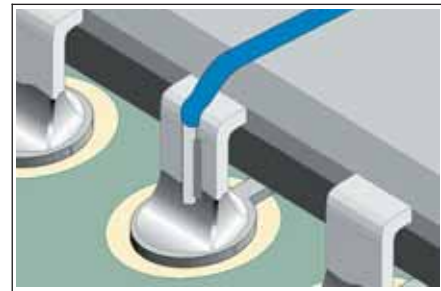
Not Recommended Wire soldered to lead, wire over component.
